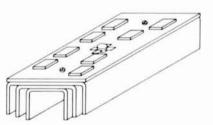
Printed-circuit board and heatsink mounting details. Mounting pads for components are made of PC board material.
